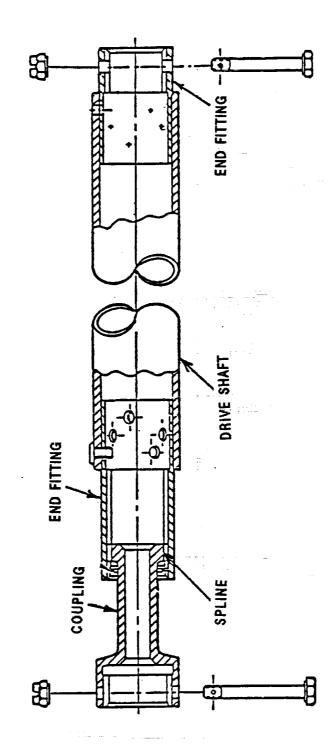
RSB AND BF TORQUE TUBE CONFIGURATION
